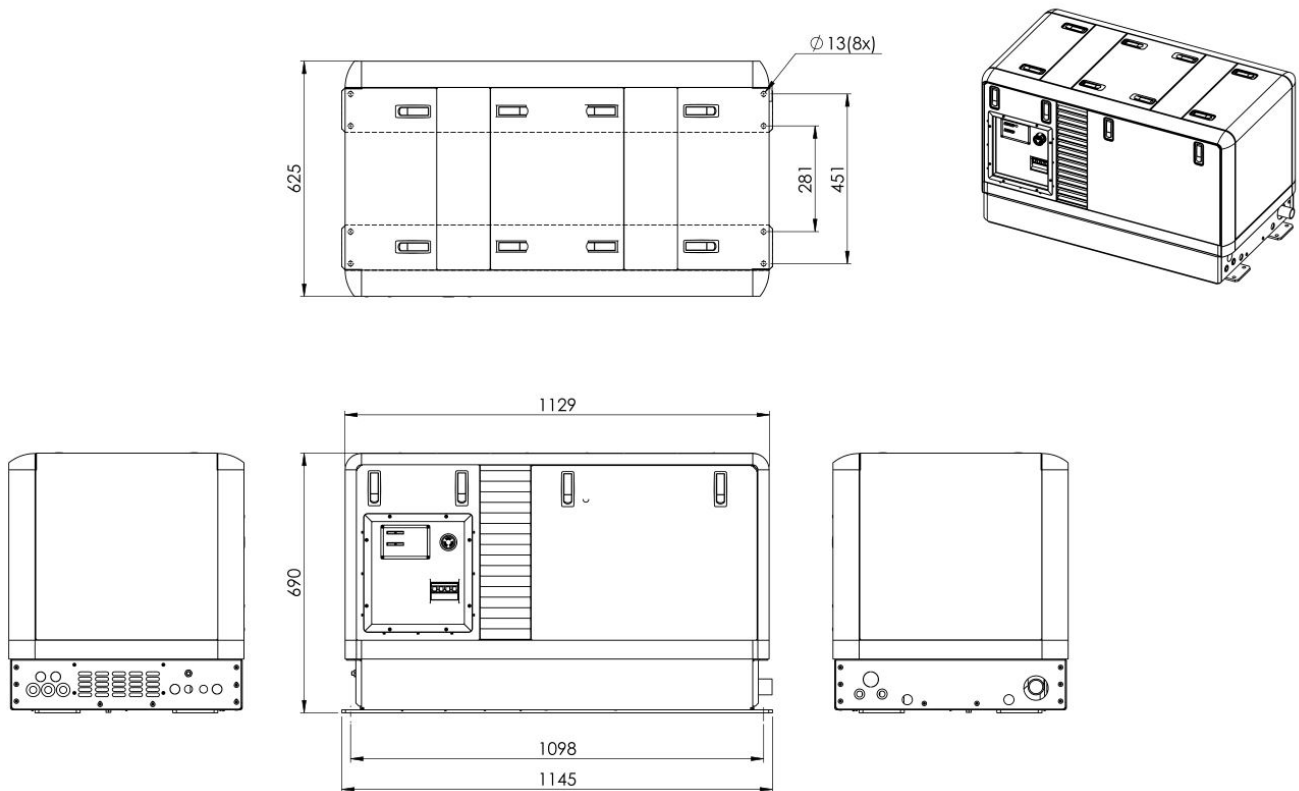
Outer dimensions (mm) W-SQ- PRO 15/10.8
